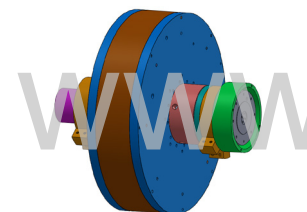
Schenck, dry gap, disc type eddy-current dynamometer 1, rotor; 2, rotor shaft; 3, coupling flange; 4, water outlet with thermostat; 5, excitation coil; 6, dynamometer housing; 7, cooling chamber; 8, air gap; 9, speed pick-up; 10, flexure support; 11, base; 12, water inlet; 13, joint; 14, water outlet pipe
